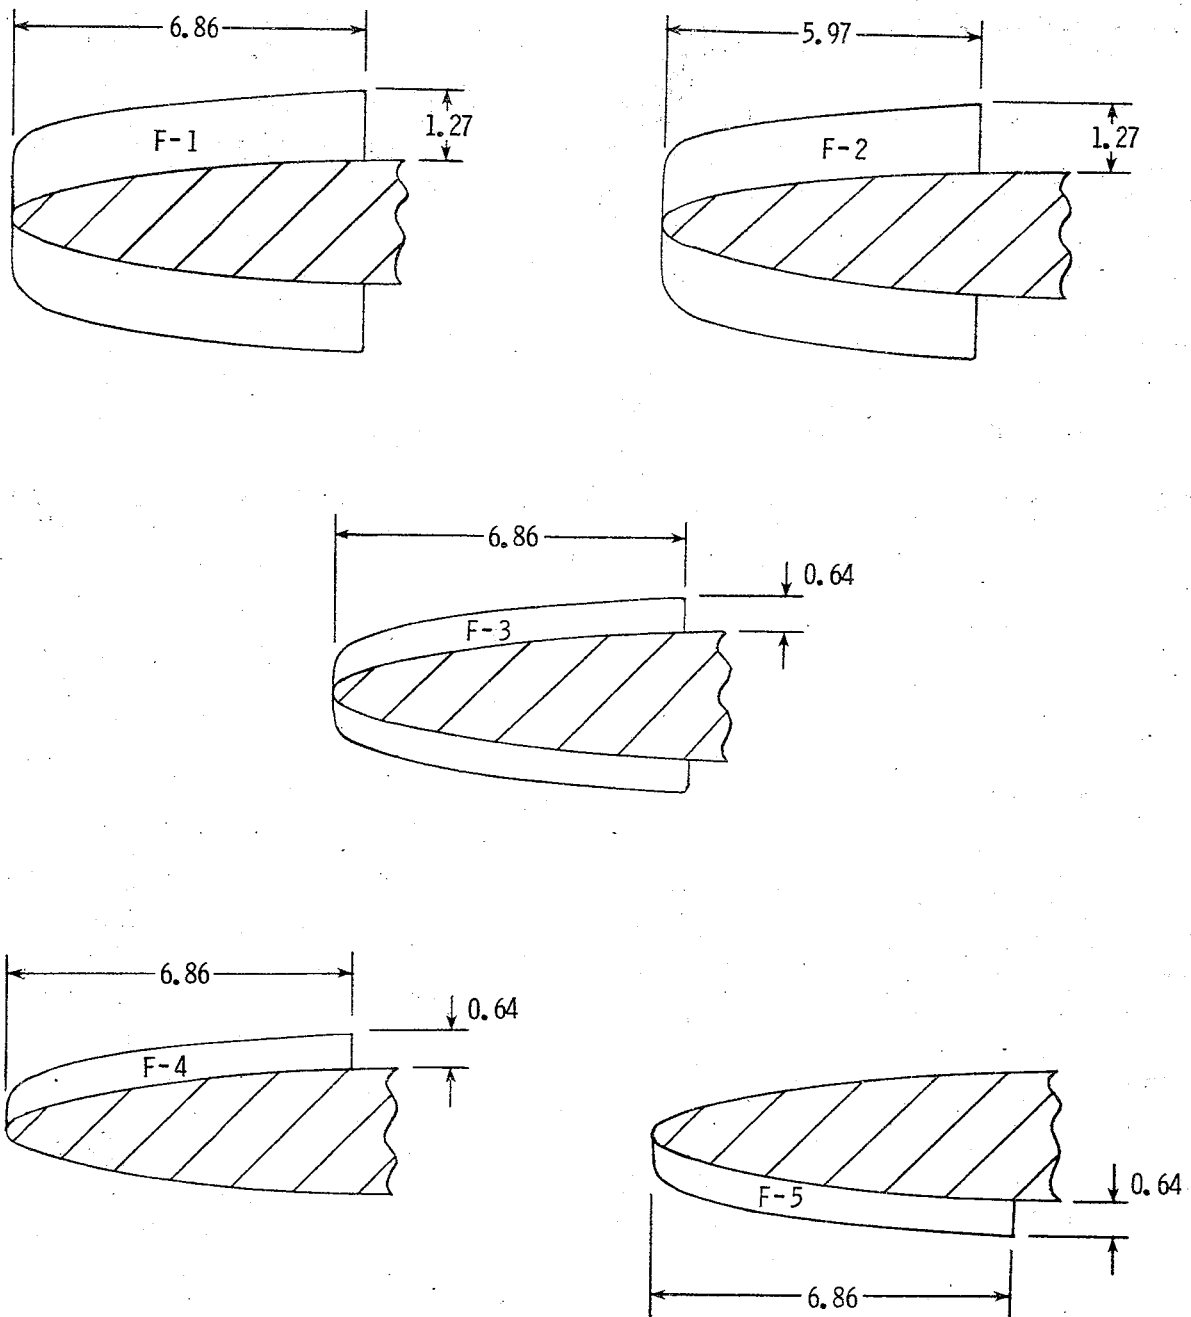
Drawing of fences tested. Dimensions in centimeters.
